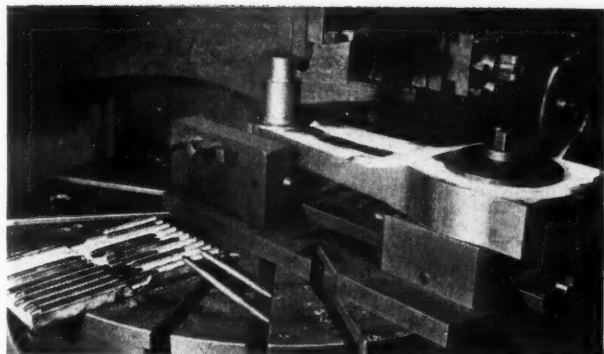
Several different sizes of crank arms can be machined in the fixture shown here. This tool was designed by Angus engineers.
